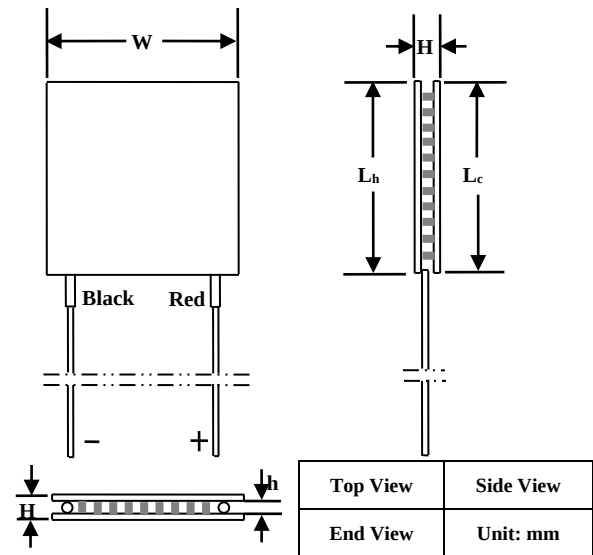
Mechanical Dimensions of Non-sealed ATE1-71
